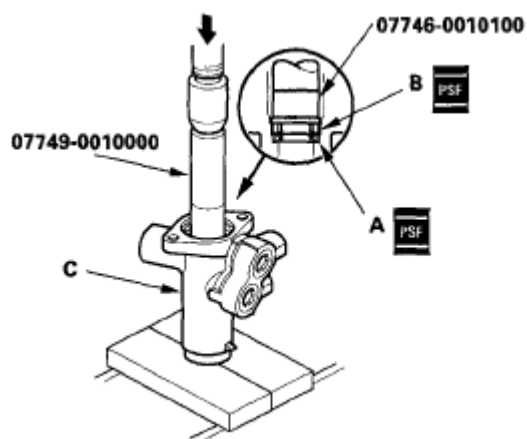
Identifying Area Applying Power Steering Fluid To Seal Ring Lip
